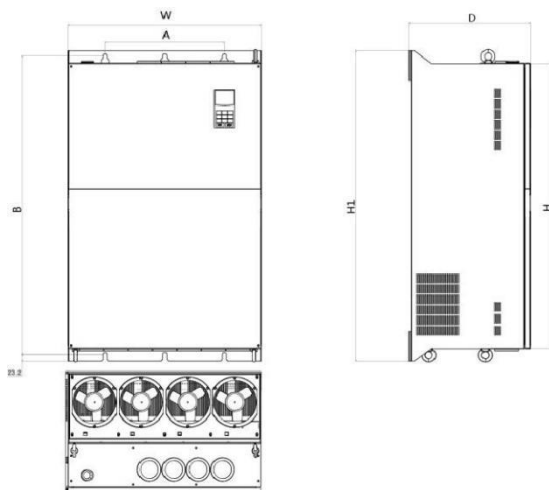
Schematic diagram of external dimension and mounting dimension of metal plate structure
